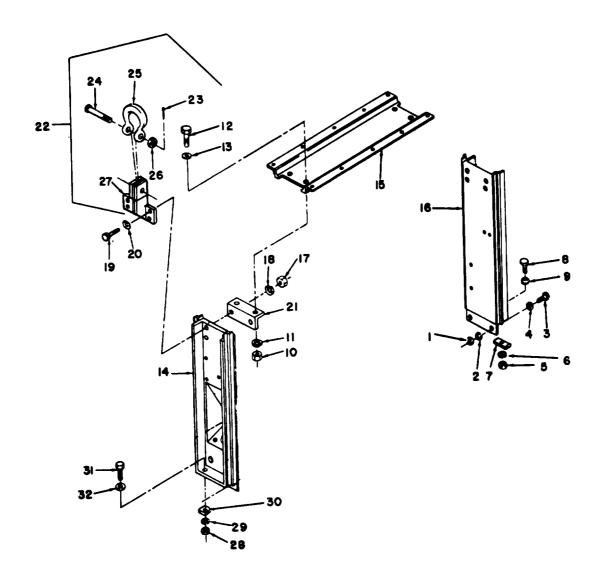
Relay Table Assembly, Exploded View effective on generator sets serial numbers KZ00001 and up
